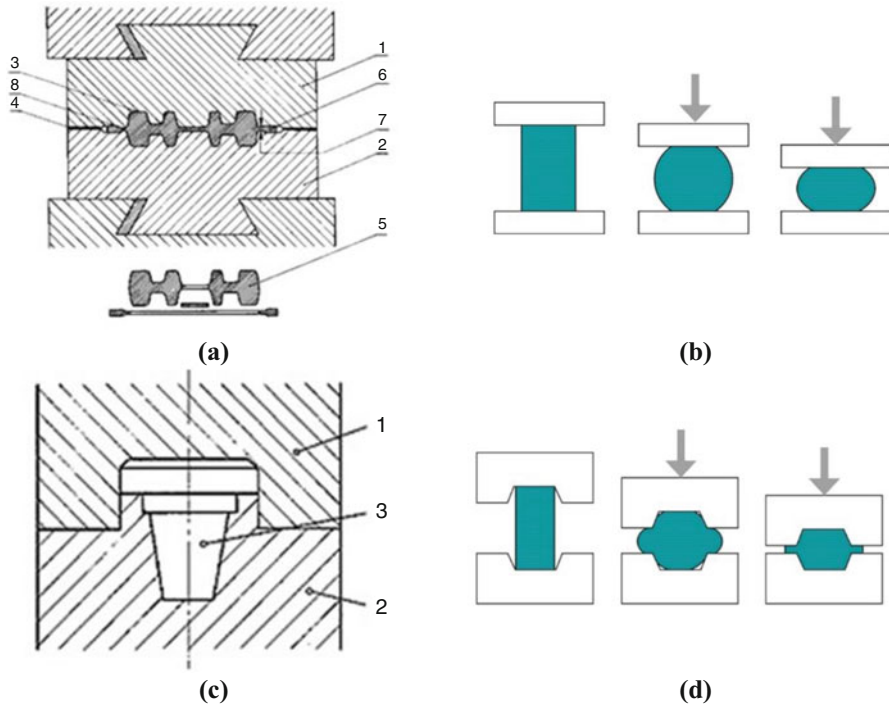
Comparison of forging processes [9, 11 and own work]: a-b) open-die forging (1 – upper die, 2 – lower die, 3 – die cavity, 4 – parting line, 5 – workpiece, 6 – flash gutter, 7 – die land height, 8 – die land), c-d) closed-die forging (1 – upper die, 2 – lower die, 3 – workpiece)
